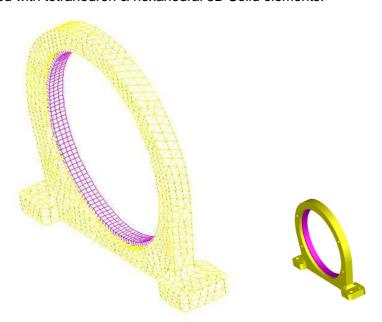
Fixed Bracket Clamp & Collar & Wedge Assembly FEM
